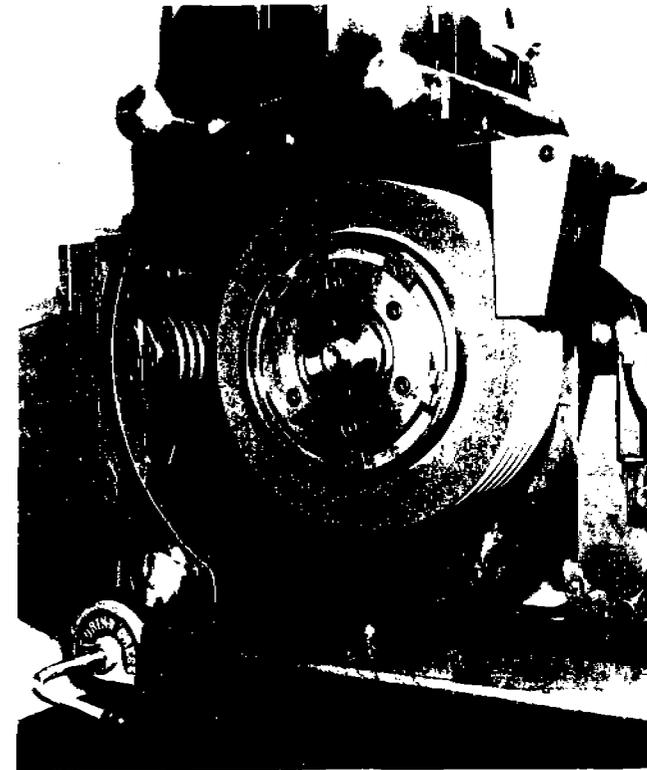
Crush dresser mounted behind the wheel. For dressing, the wheel is fed back into the roll with considerable pressure, enough to break down and sharpen the grains. (Bendix Corp.)
